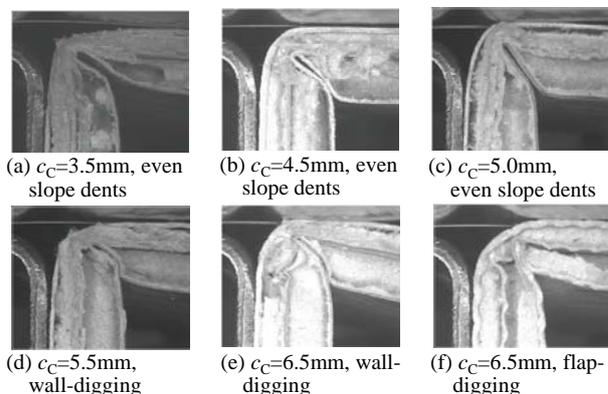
Side views of upper folded corner of Cpb1 (LB210-MD120) at the initial set-up in compressive test apparatus. The fixing condition IF+OF was illustrated.
